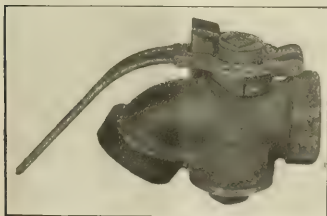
ANGLE COCK OPEN, HANDLE LOCKED.
